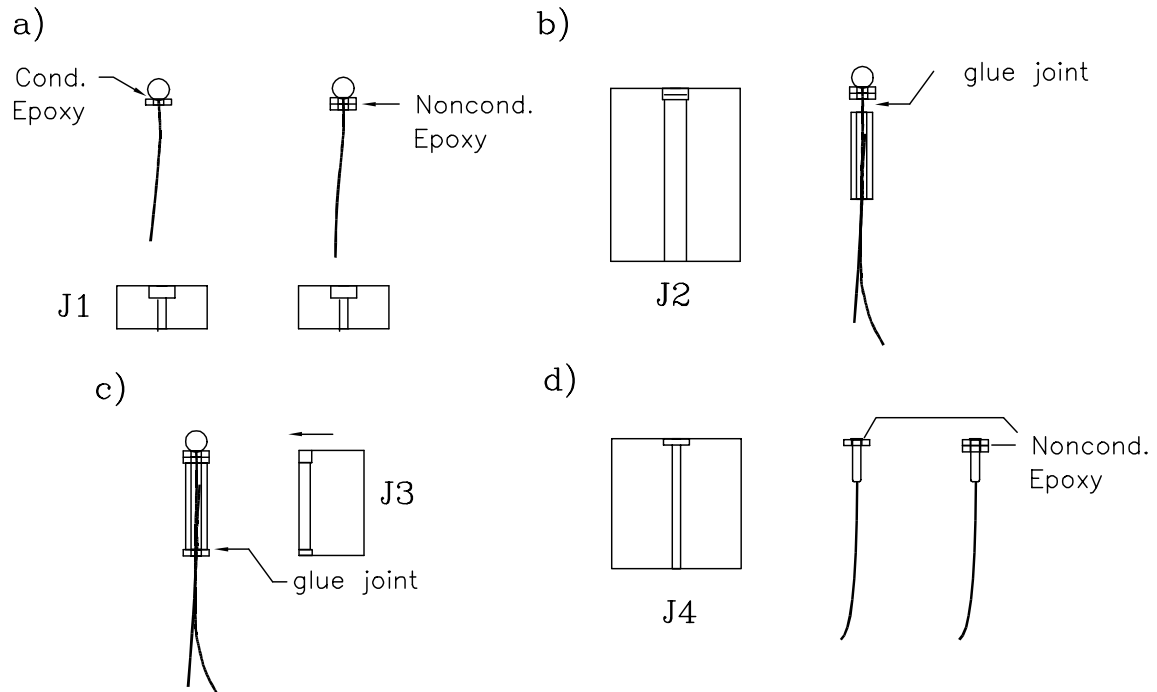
Jigs used for gluing. a) J1 is used for gluing the wire to the ball and the second sapphire washer. b) J2 is used for gluing the ball assembly to the piezo tube. c) J3 is used for gluing the bottom sapphire washer to the piezos and also for centering the inner piezo on the base plate. d) J4 is used for gluing the tip socket to the sapphire washer.
